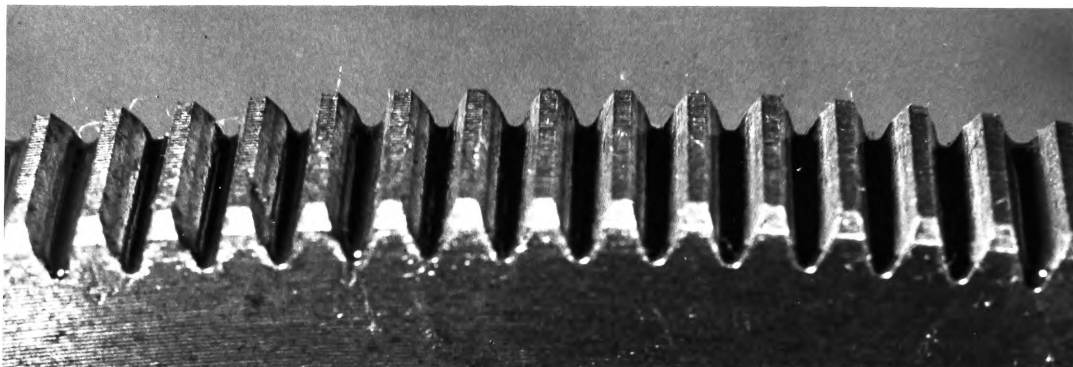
TEETH OF GEAR SET 2 WHEEL - 8573 HOURS
